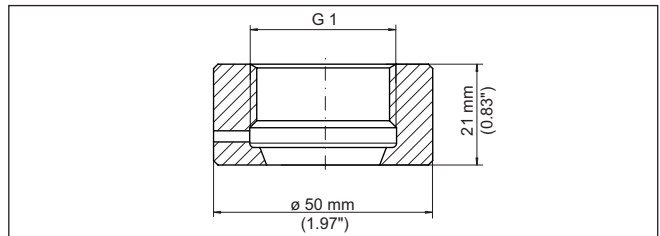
Dimensions direct welded socket G1 - Cone seal
